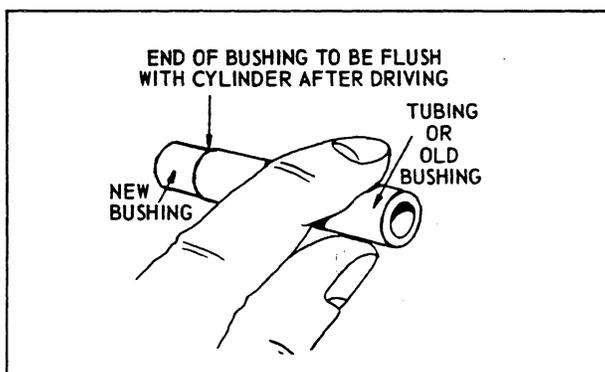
Inserting Plunger and Bushing in Cylinder
